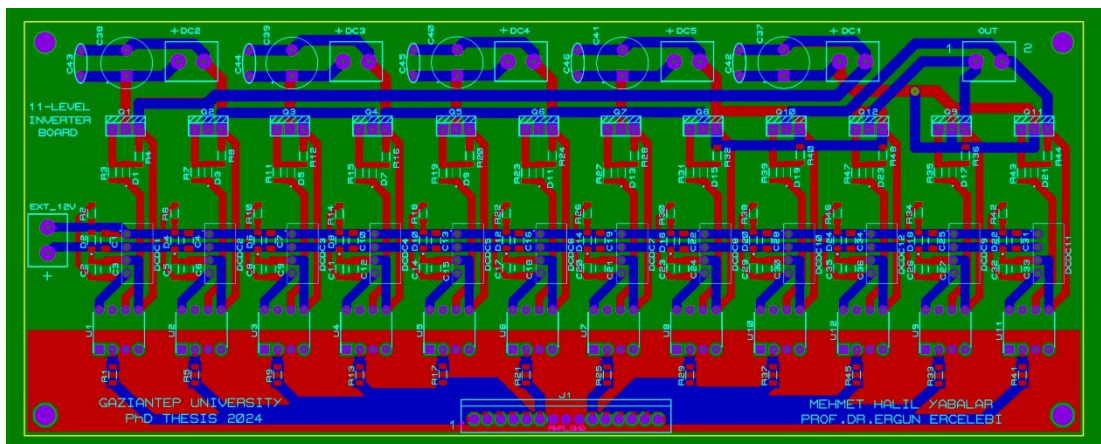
PCB layout of 11-level reduced switch MLI.
